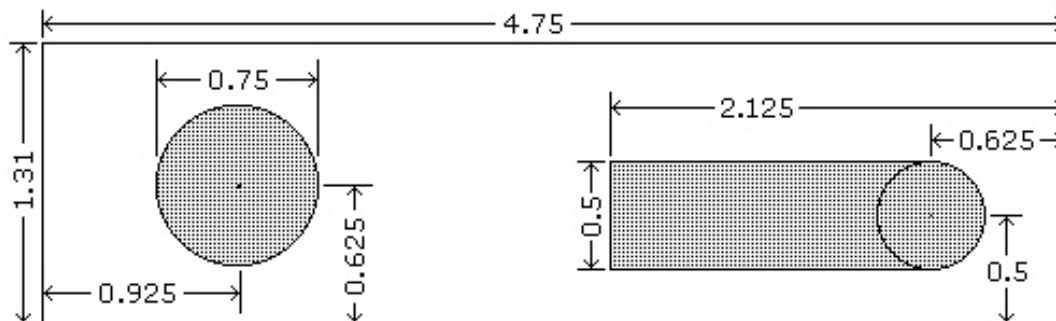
Rear view of the case's rear panel insert. Figure shows dimensions in inches: 0.925" = 23.5mm, 0.75" = 19mm, 0.625" = 16mm, 0.5" = 12.7mm.
